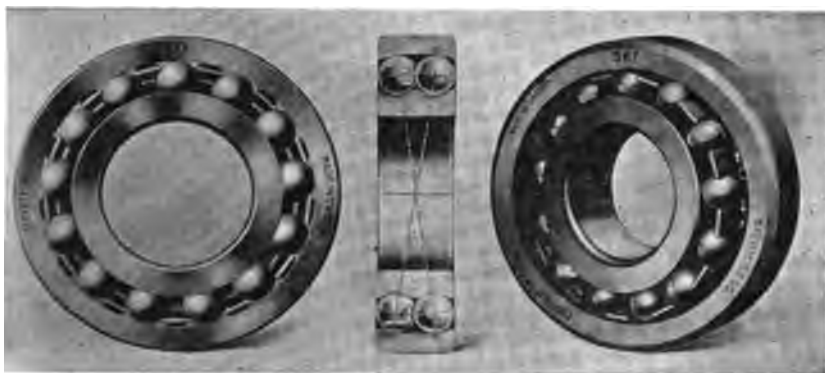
SEC. 7b.—S. K. F. ball bearing, with pressed steel retainer, showing bearing in normal, deflected and sectional view.
